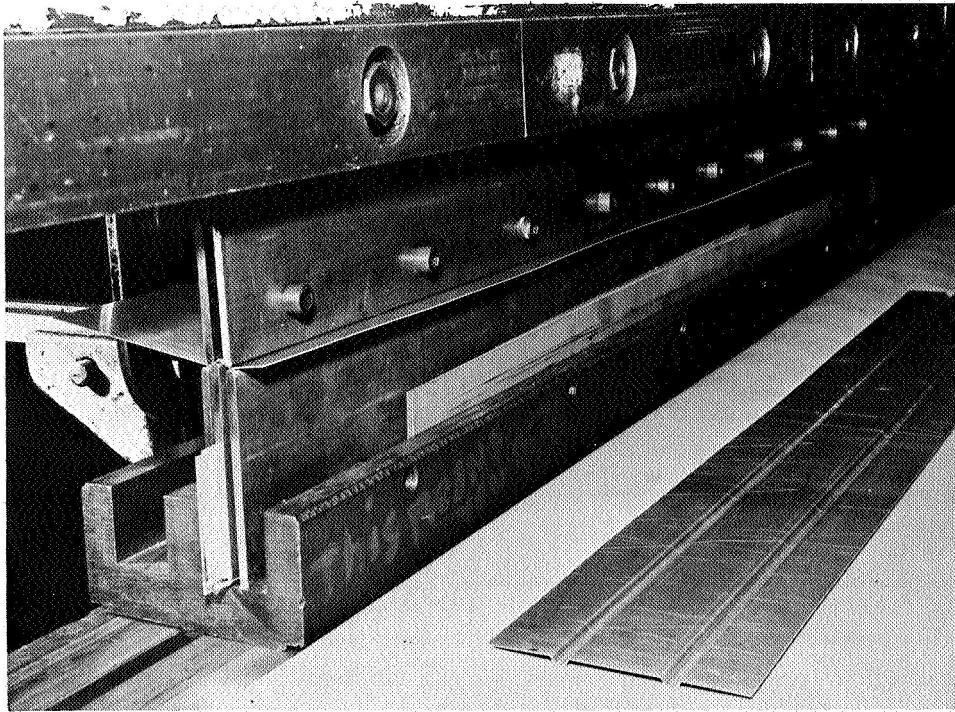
BRAKE FORMING A BEAD IN AM-350 CRT FLAT STOCK
